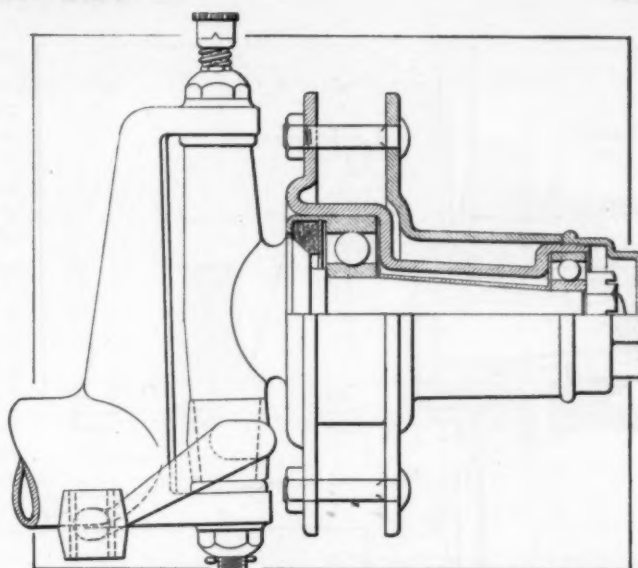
Drawn steel hub, annular ball bearings, and hollow knuckle swivel pin with grease cup lubrication
